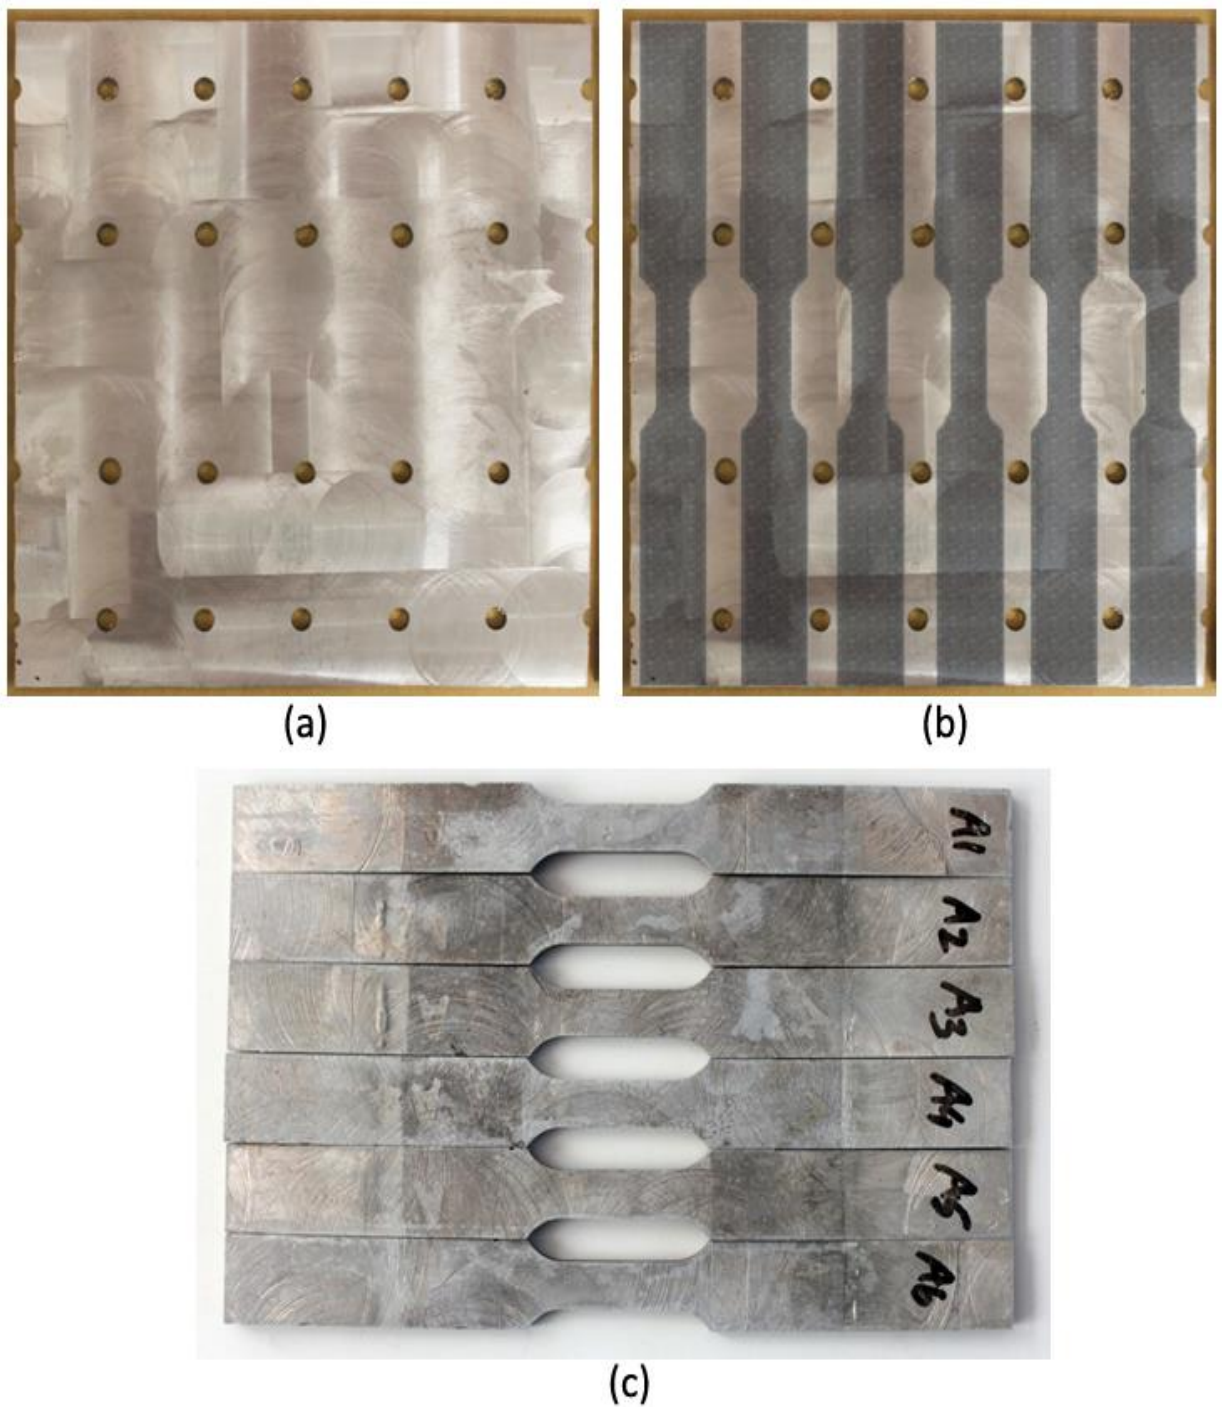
Photographs from: (a) machined plate of 3.5mm thickness (b) proposed locations from which the tensile specimens were obtained, and (c) final tensile samples machined from milled plates.
